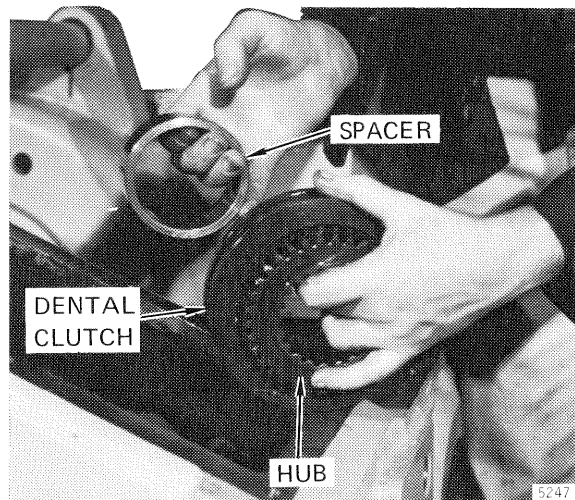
INSTALLATION OF BRAKE SHAFT ASSEMBLY (Sheet 2 of 2)
